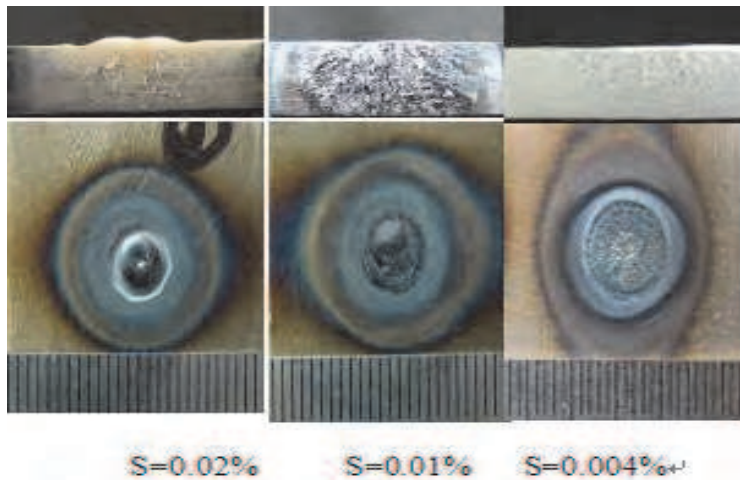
Appearance of weld spot under the same welding condition.
